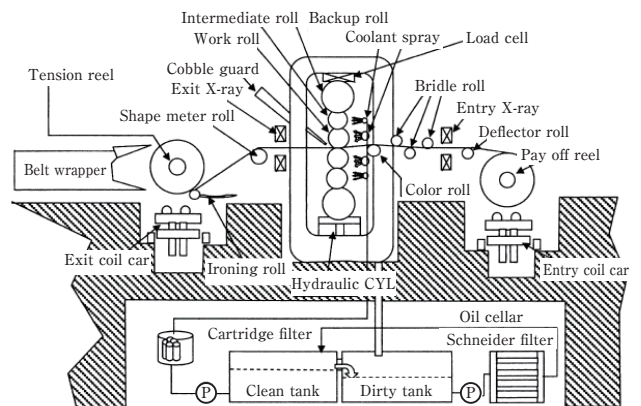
Cold rolling mill (6Hi-nonreversible mill)<sup>5)</sup>.
